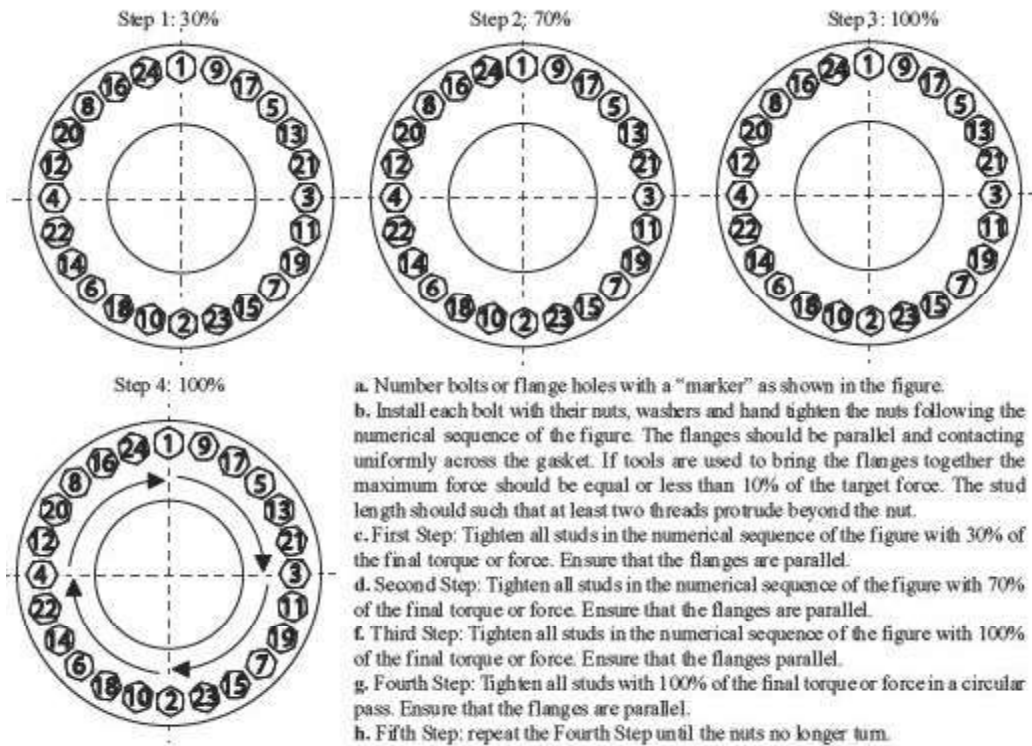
Example of Star or Legacy Tightening Pattern for a 24-bolt Flange using a Single Tool
